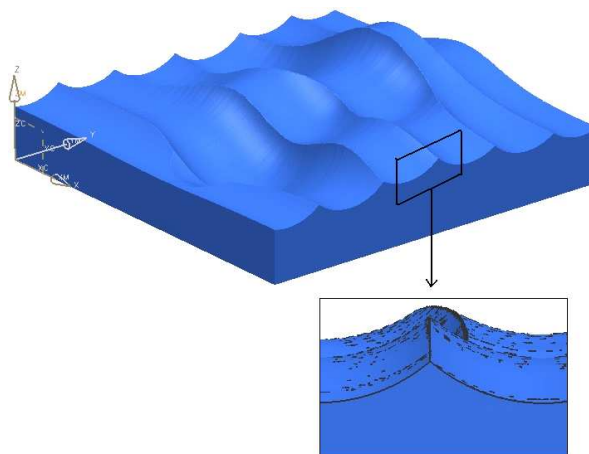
Cut surface for a standard zig zag tool path and the zoomed view of a section
